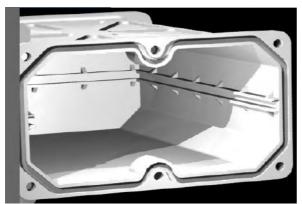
Internal chassis & support & external sleeve of enclosure ((Du Plessi 2008)
